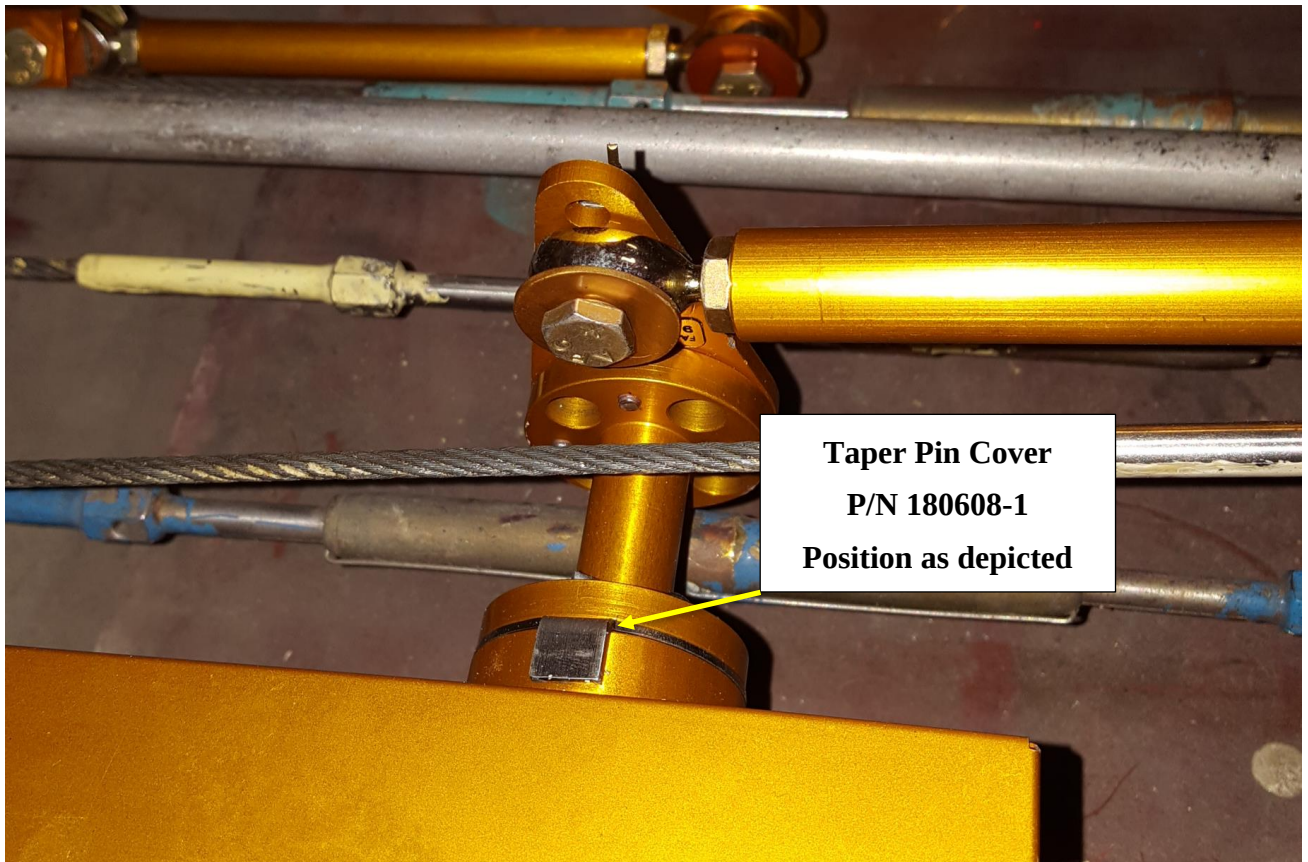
SERVO EXTENSION AND TAPER PIN COVER
